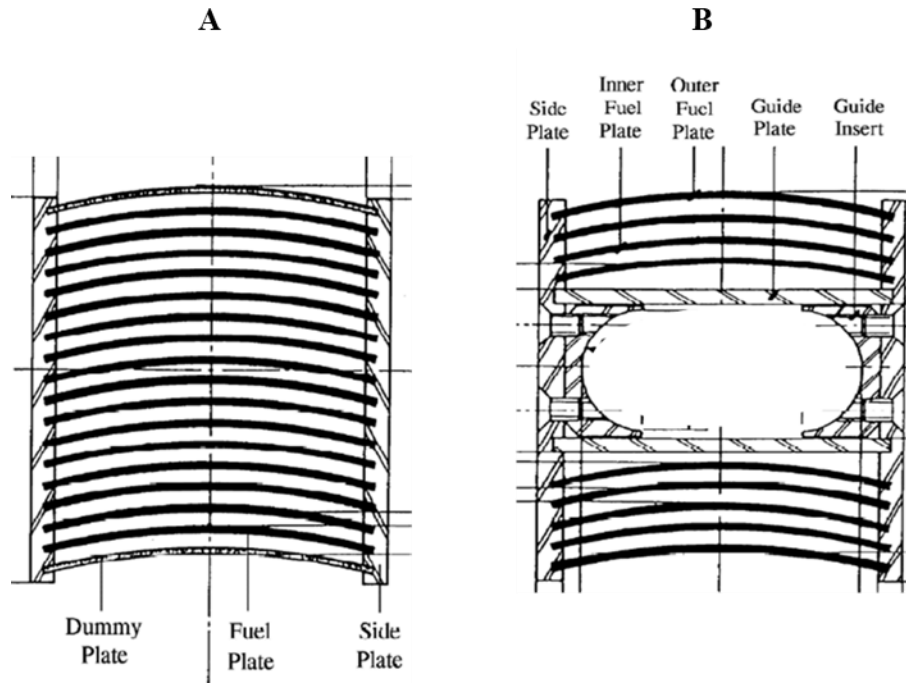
Overhead view of a standard assembly (A) and a control assembly (B) showing the fuel, dummy, and side plates, and the structural components that house the control rods [40]. Dimensions have been removed from this figure.
